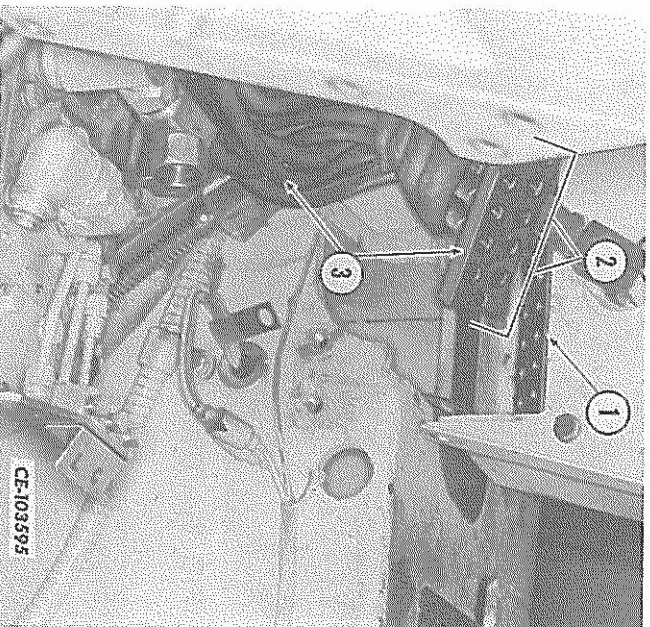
Removing the Transmission Hose and Manifold Assembly
